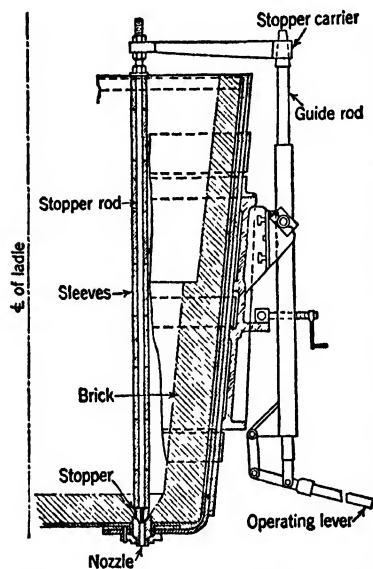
Section of a Bottom Pour Ladle (Boylston).
